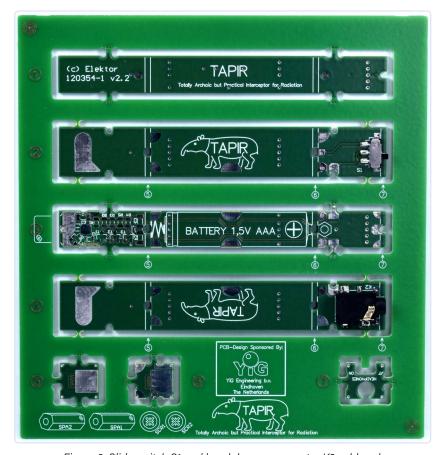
Slide switch S1 and headphones connector K2 soldered.
